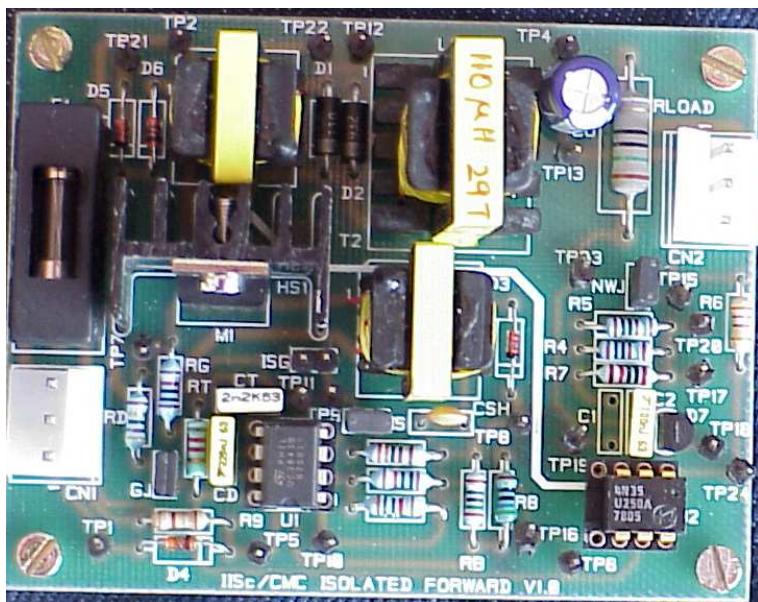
Mounted PCB Board of the CMC-forward Converter
